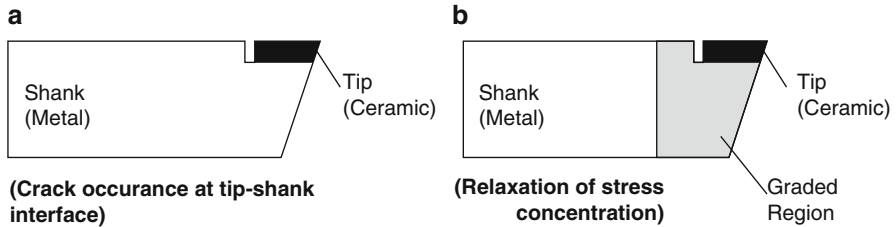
Lathe metal cutting bites: (a) Conventional bimaterial type, (b) FGM design [139]
